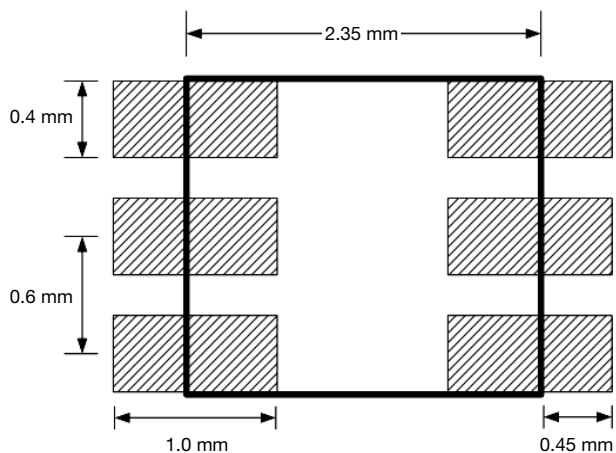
VEML6070 OPLGA PCB Layout Footprint
